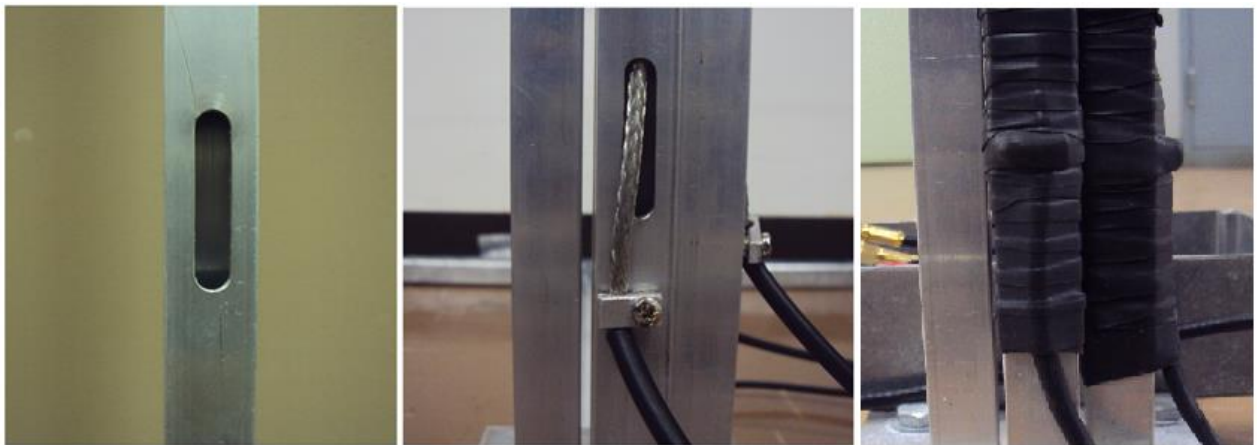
Feeder-boom cavity, cable clamping, and waterproofing seal
